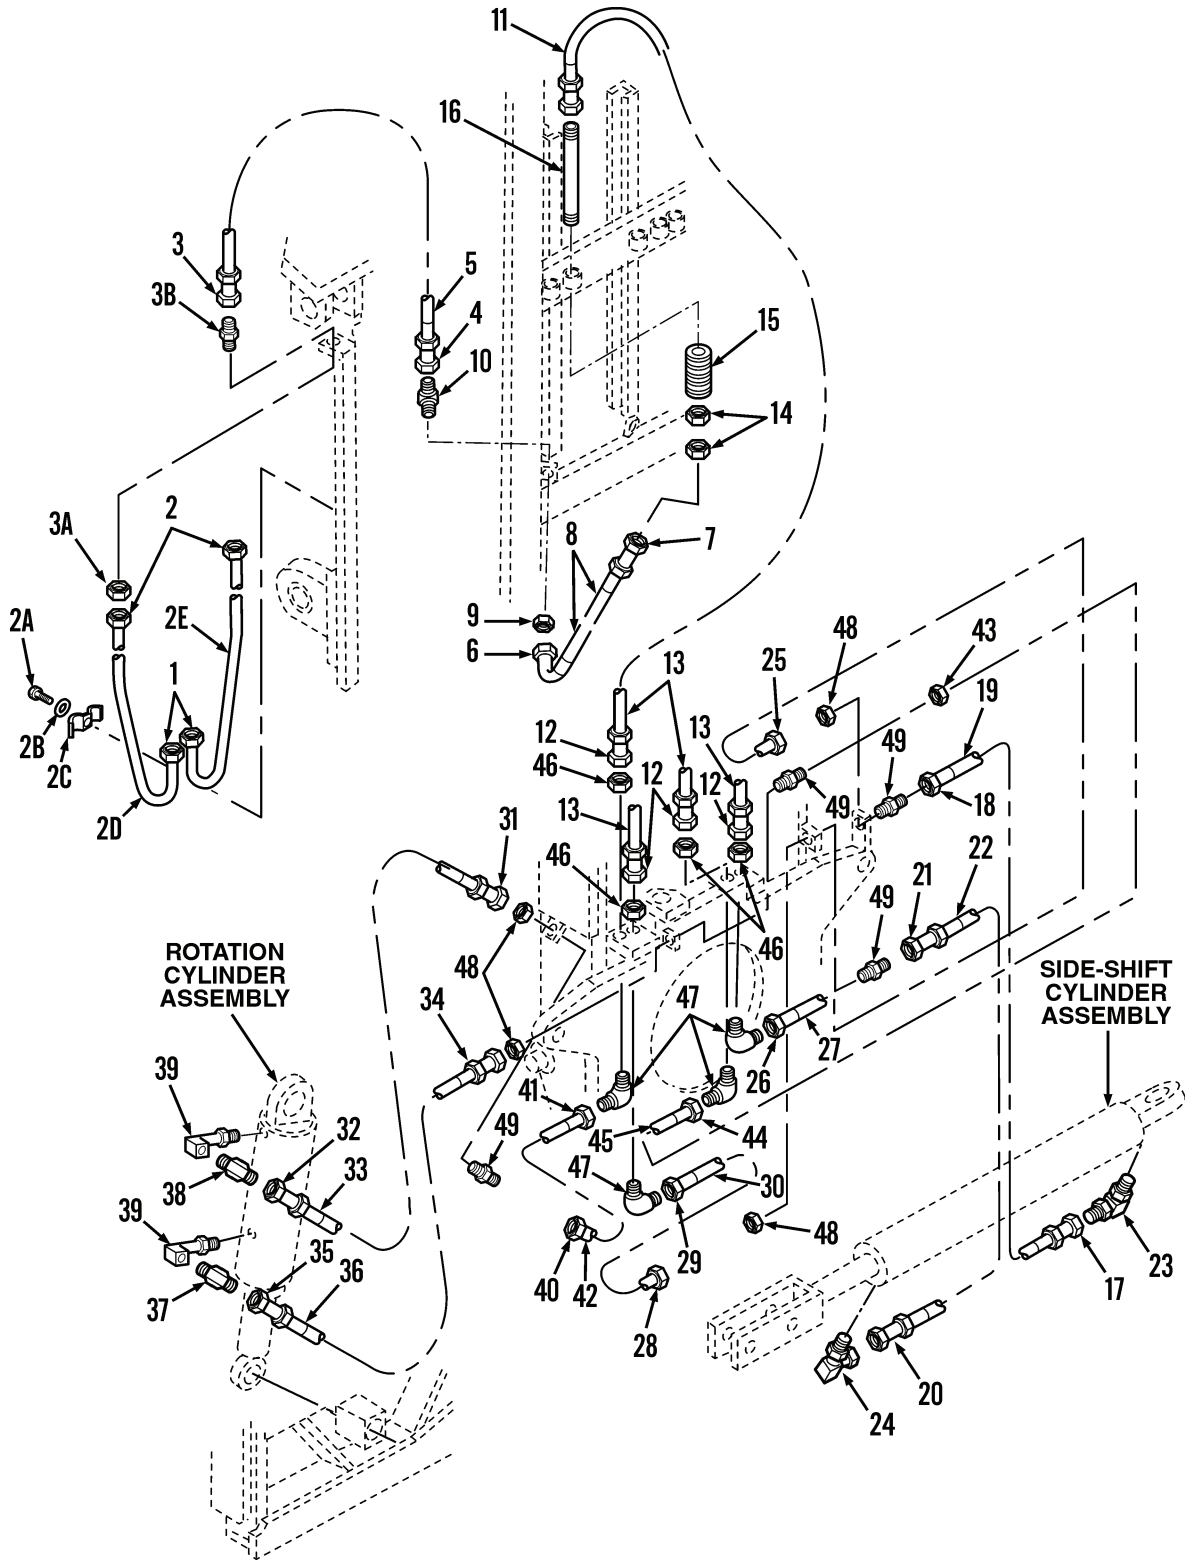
Hydraulic Hoses, Lines, and Fittings.
